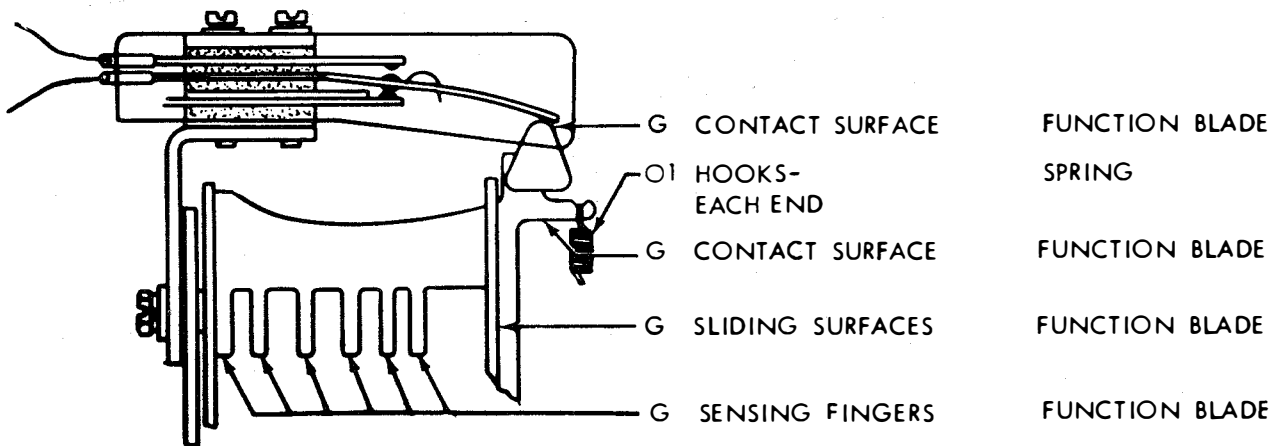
Signal Bell Contact Mechanism, Right Side View
